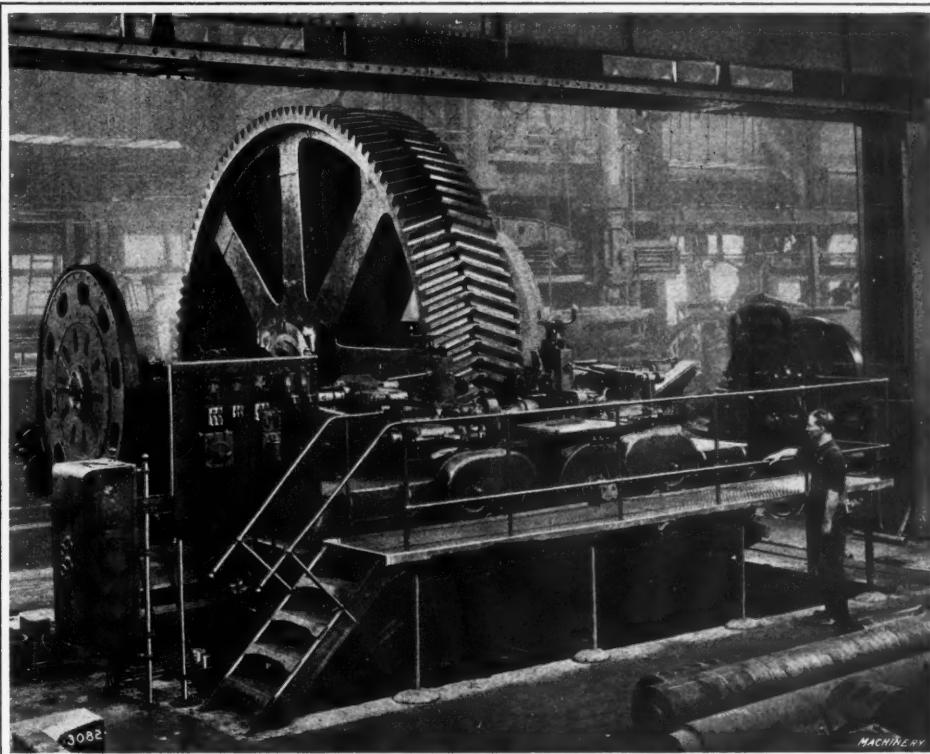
Herringbone Gear Tooth Planer developed by Mesta Machine Co. for Heavy Work
